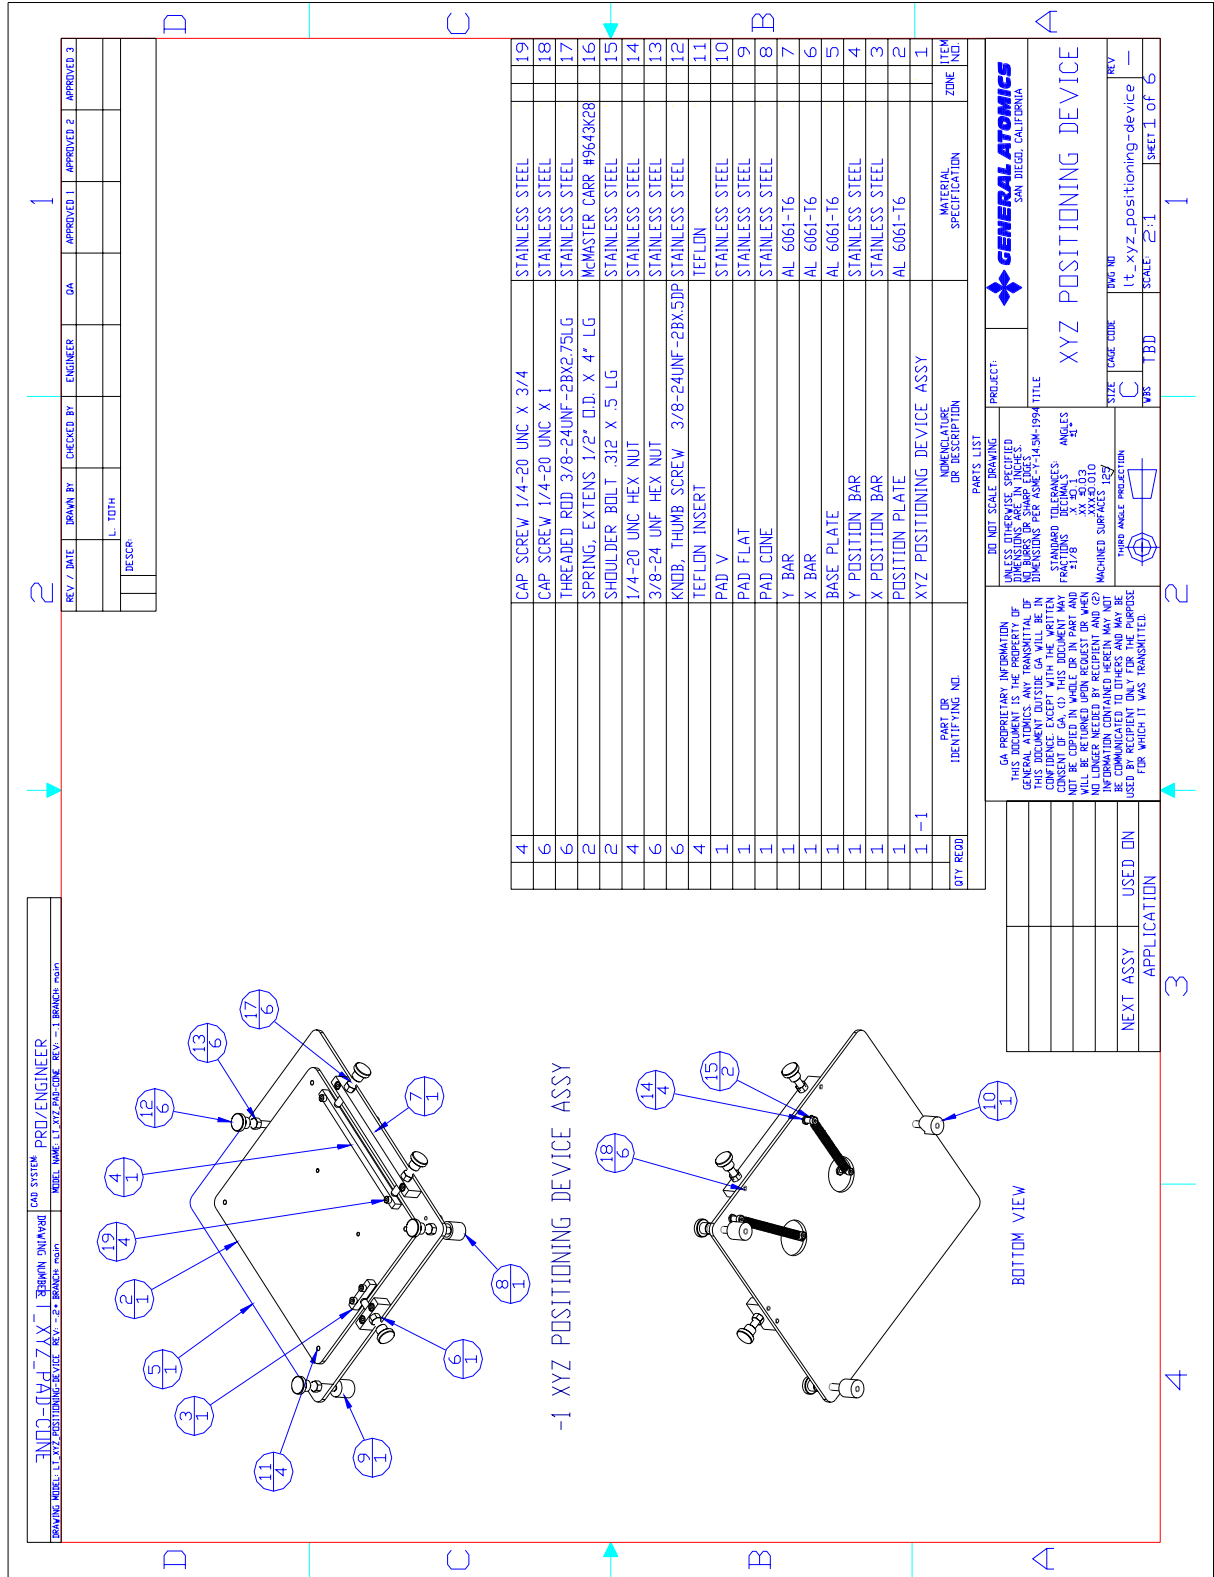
Assembly Drawing of Argonne Projector Positioner.
